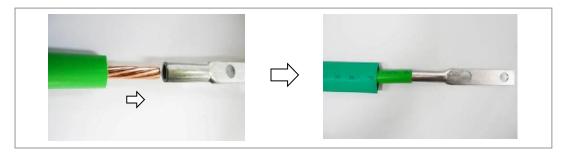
Fixing Pressure Terminal_Handheld Compressor (1)
